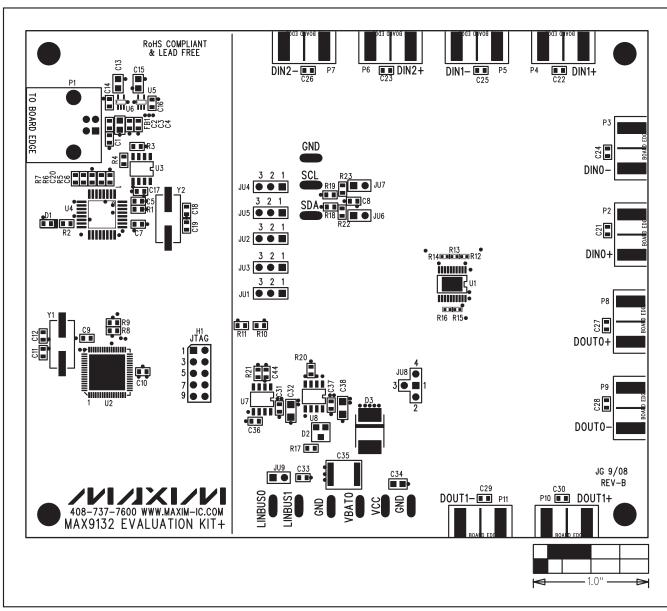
MAX9132 EV Kit Component Placement Guide—Component Side
